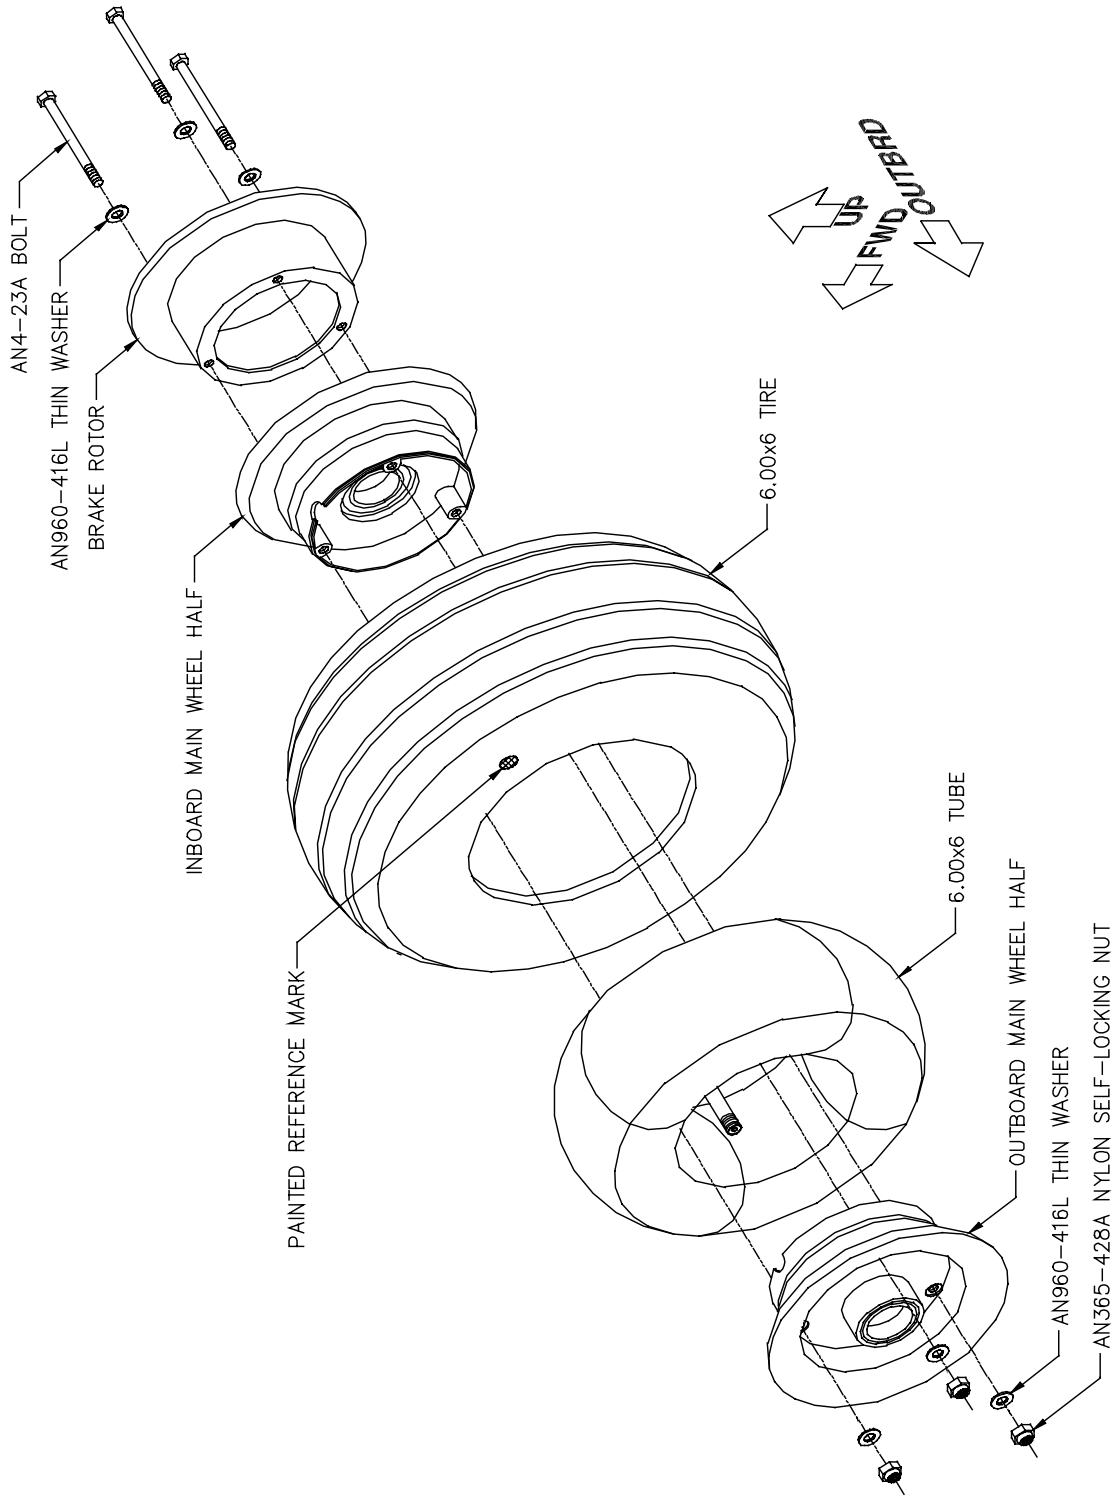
Mounting the Tube and Tire on the Wheel Assembly
